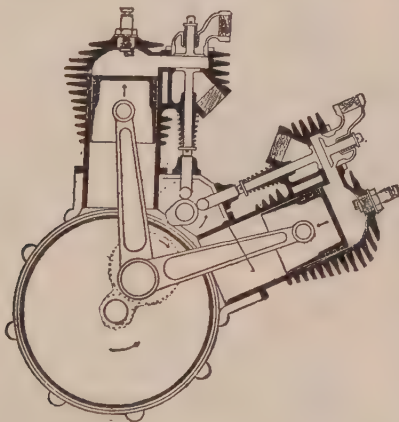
Sectional view of a "V" twin cylinder motor cycle engine. This type is in general use on the higher powered machines. Simplicity and lightness are secured in this design as one cam shaft and a single crank suffice for the two cylinders.
